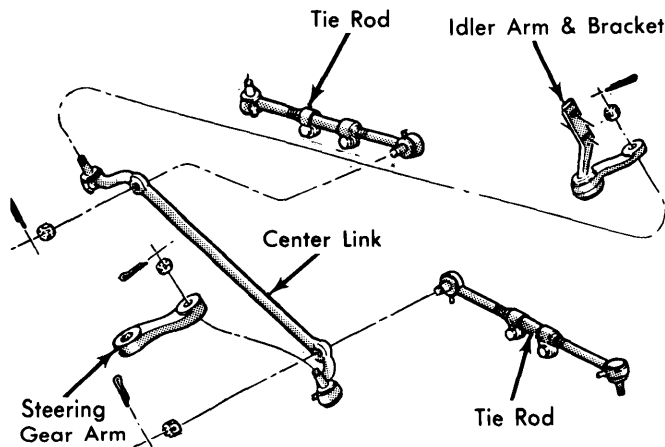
Disassembled View of Steering Linkage for "D", "AD" and "PD" Models
